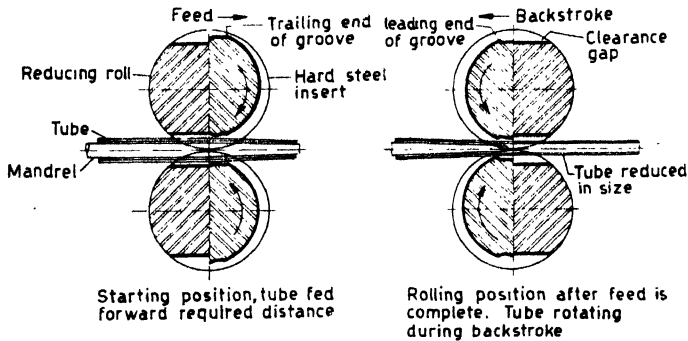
Tube rolling machine — (Tube Reducing Corp.).
